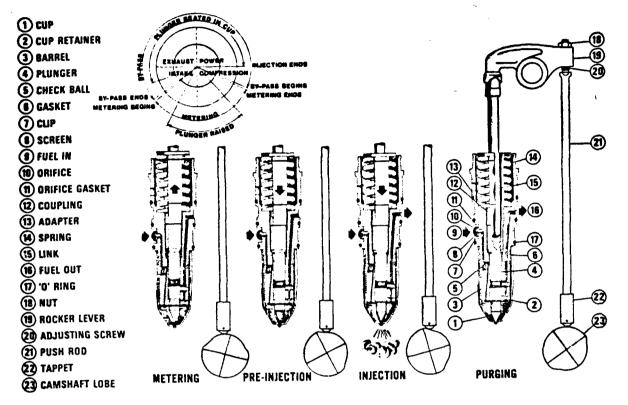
, (FWC-24). Fuel injection cycle PT (type D) injector 3/8 inch diameter plunger
